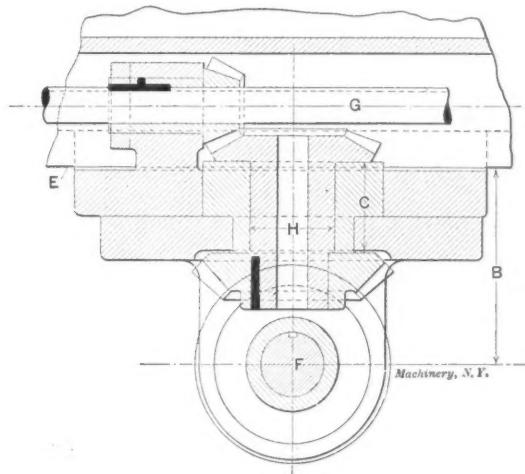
A Common Form of Drive for Radial Drill Spindles.
